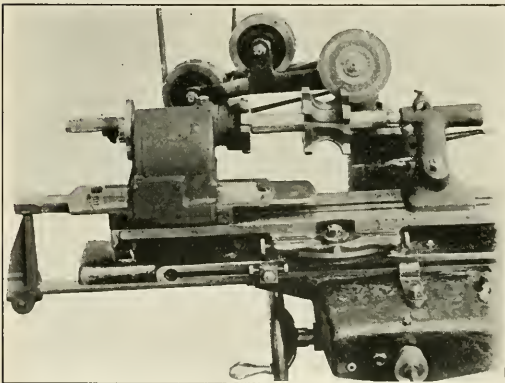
Hob-Grinding Attachment for Le Blond Tool Room Grinder
